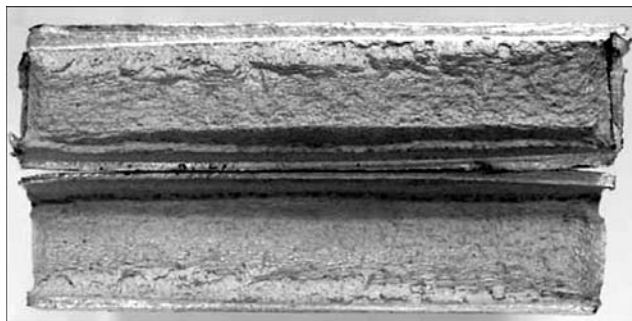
Appearance of fractures in welded samples with notch along the joining line
